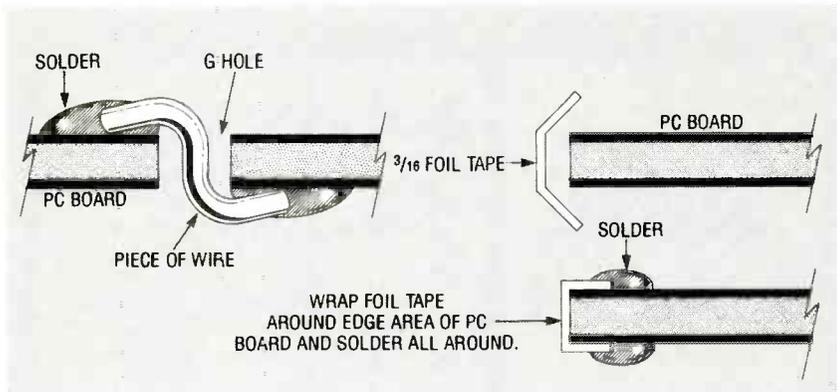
ALL HOLES MARKED "G" in Fig. 4 must have jumper wires passed through them that are soldered on both sides of the PC board as shown here. Also, both sides of the board must be grounded together with copper-foil tape as shown.
